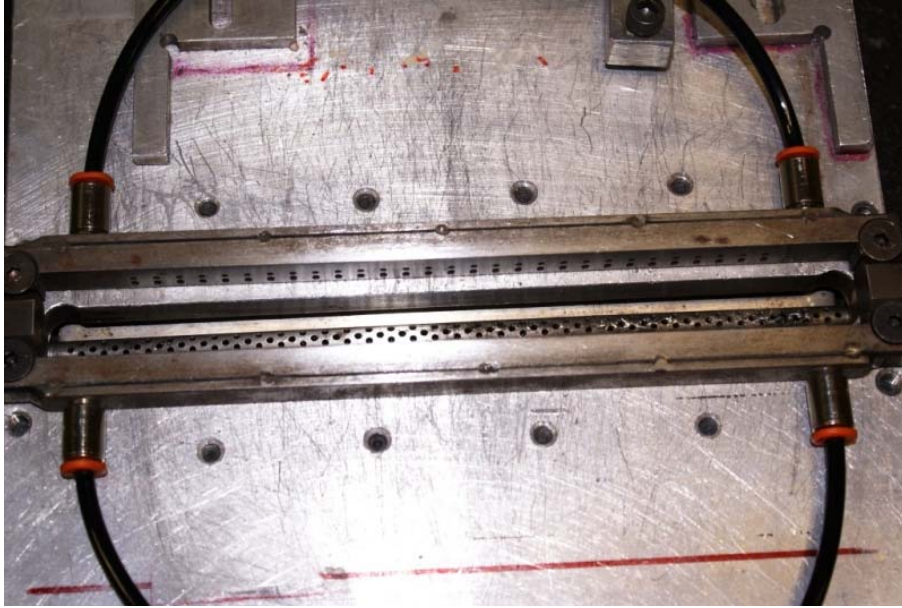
(b): Photograph of unmovable three parts of shrouding system.
